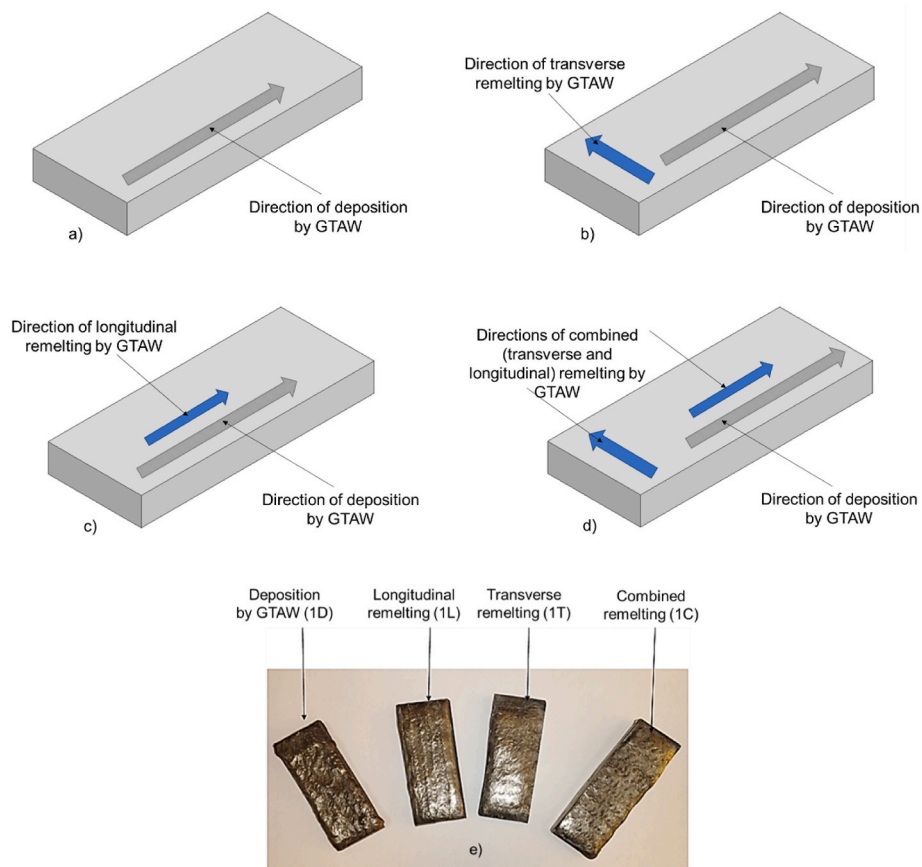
Deposition welding and remelting direction: a) deposition welding without remelting; b) deposition welding followed by transverse remelting; c) deposition welding followed by longitudinal remelting; d) deposition welding followed by combined remelting; e) samples 1D, 1L, 1T, 1C.
